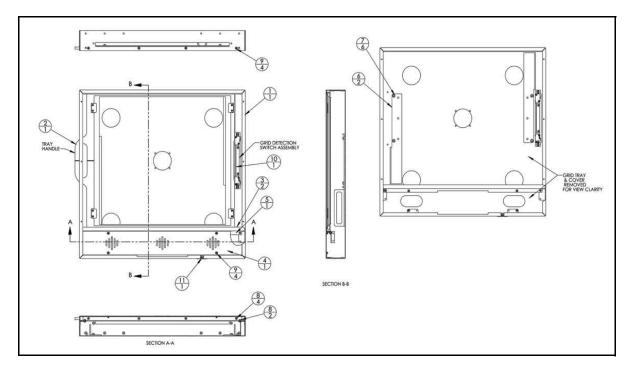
Varian Panel Cabinet Assembly (112-5500)
